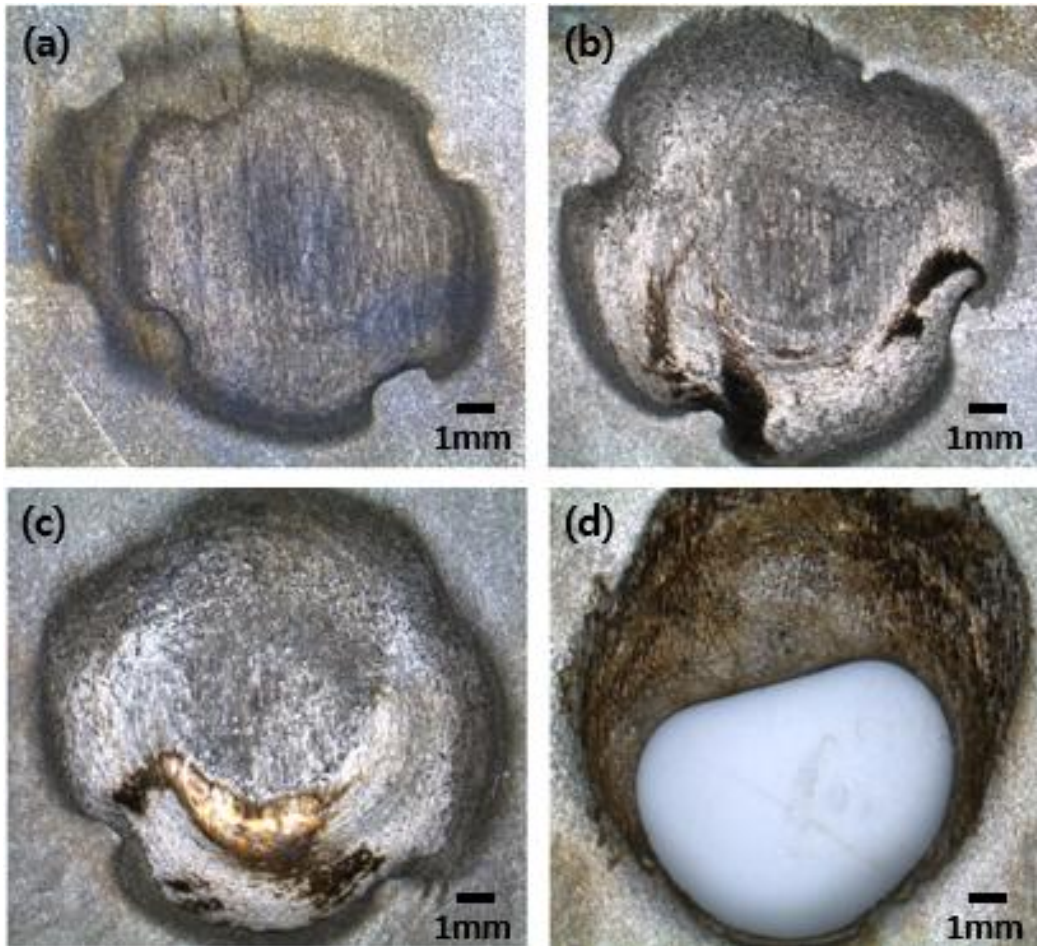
Machined hole with (a) 1.6 A/cm^2 , 1hour, (b) 3.2 A/cm^2 , 1hour, (c) 4.2 A/cm^2 , 1hour and (d) 4.2 A/cm^2 , 4hour using cylindrical electrode tool on STS304 5T
